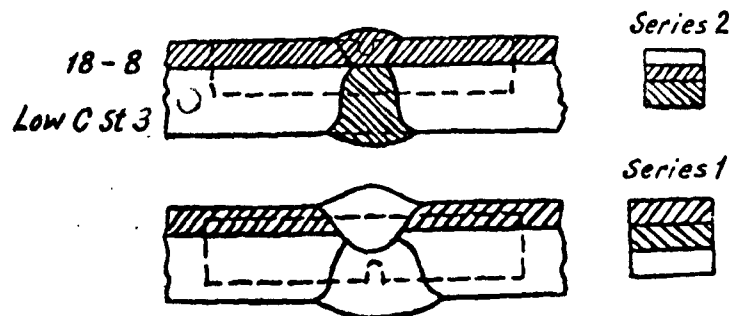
Schematic drawing showing how the specimens for impact tests in bending are cut from a clad-steel weld joint.
